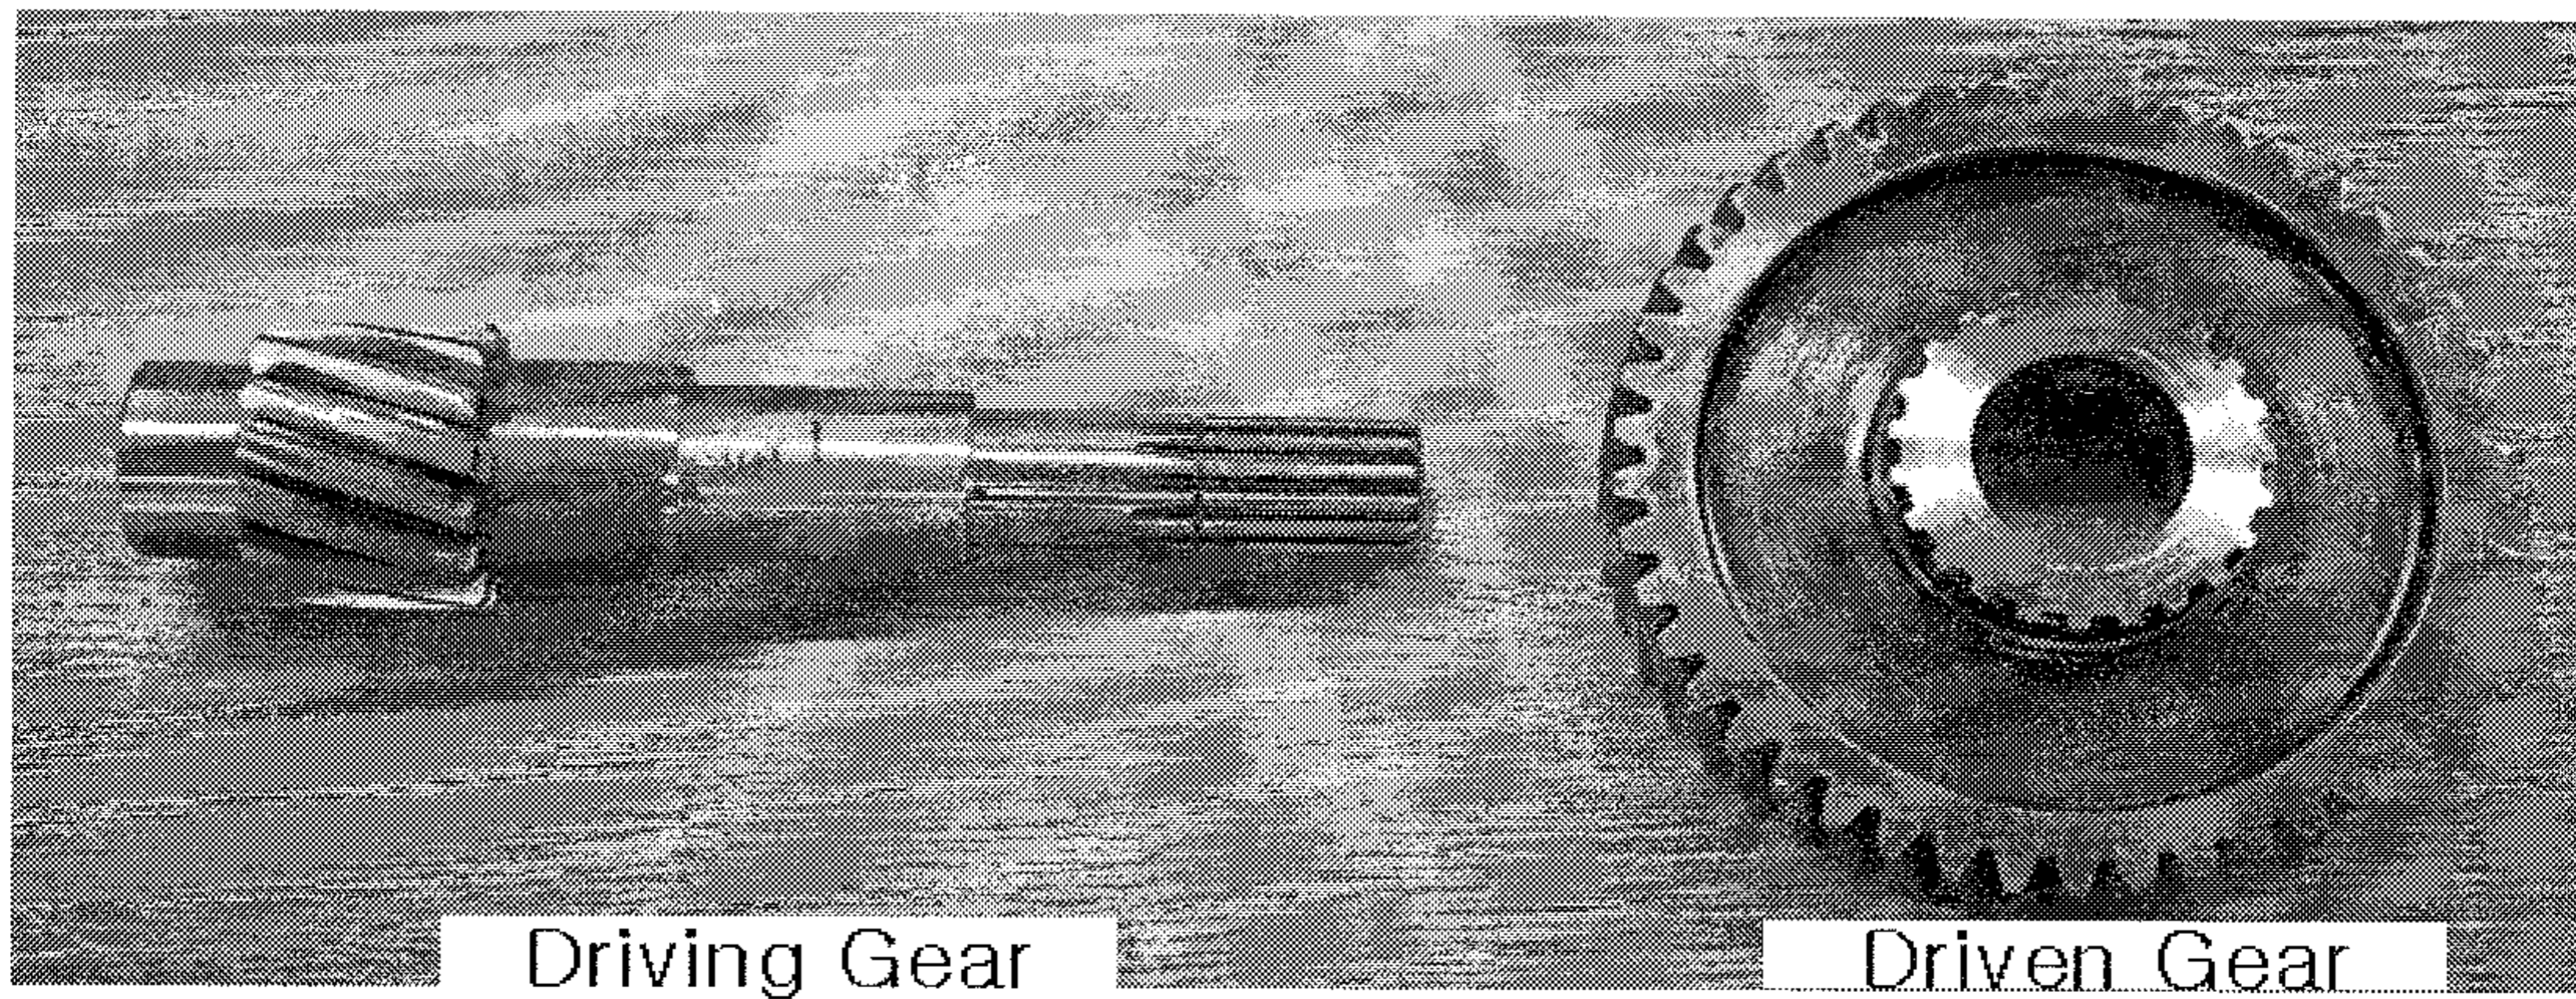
A set of driving and driven gears manufactured for rattle noise test.
